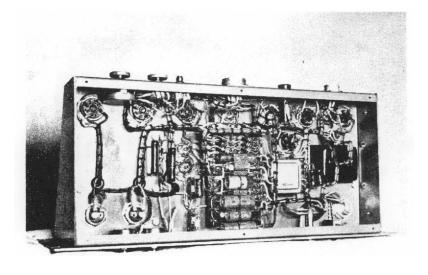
Bottom view of the oscillator-powersupply chassis
